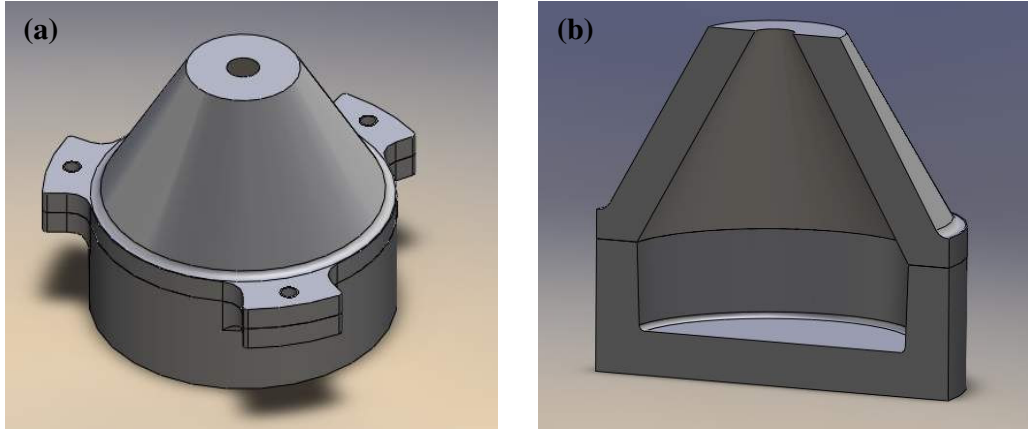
Tatur shrinkage mould (a) assembled (b) cross section
